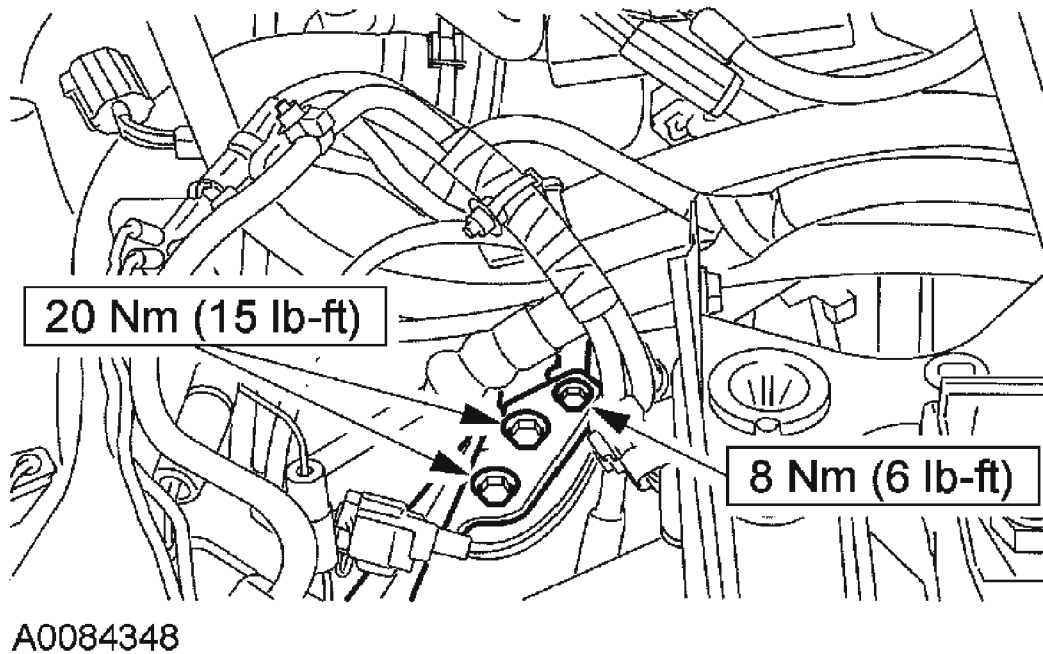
Installing Fluid Filler Tube And Shift Cable Bracket Bolts
